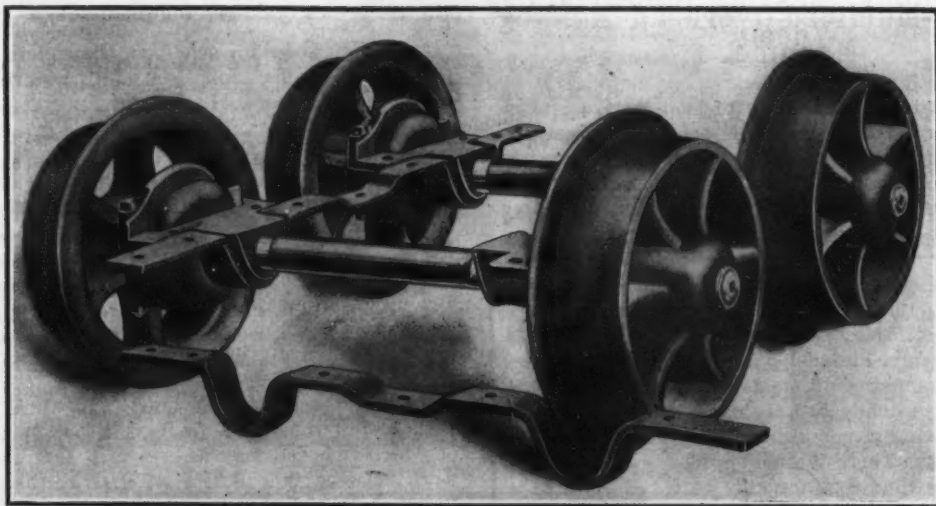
Whitney Roller Bearing Wheels Ready for Bolting to a Car.
